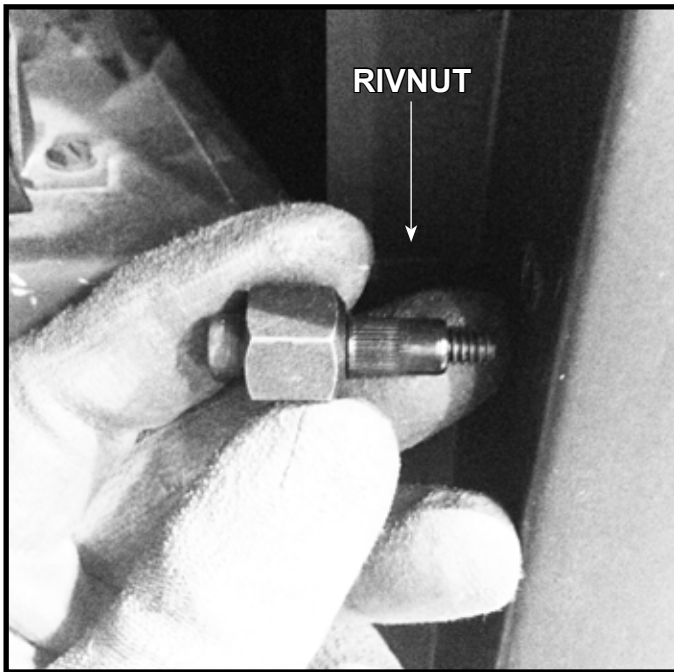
Rivnut Installed on Bushing/Bolt Assembly
